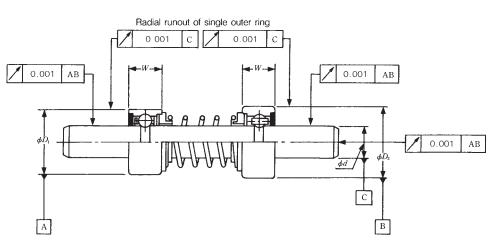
Composition and runout accuracy of bearing with integral shaft
